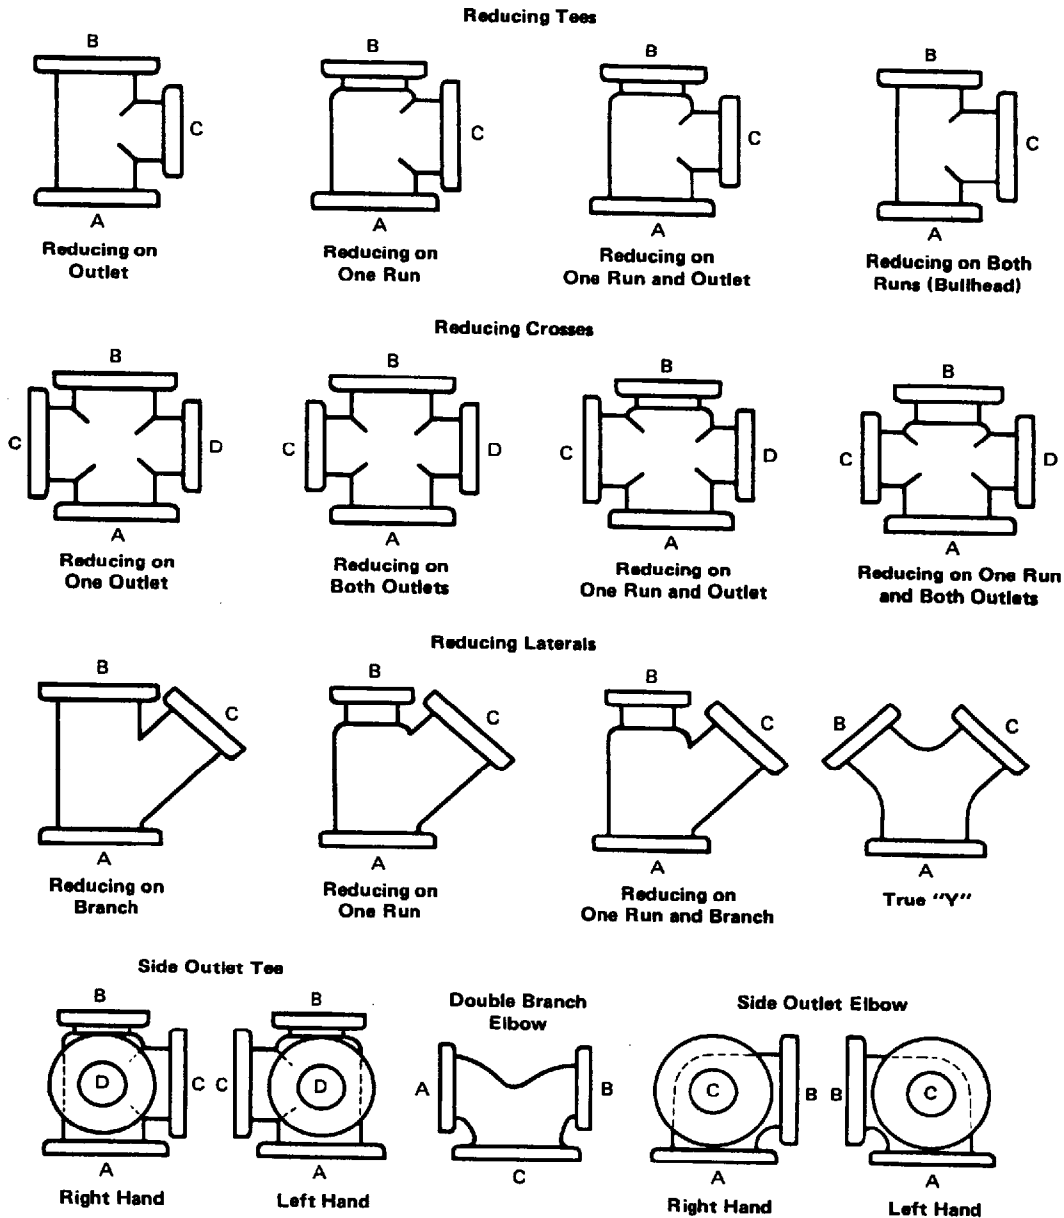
METHOD OF DESIGNATING OUTLETS OF REDUCING FITTINGS IN SPECIFICATIONS¹⁻³
